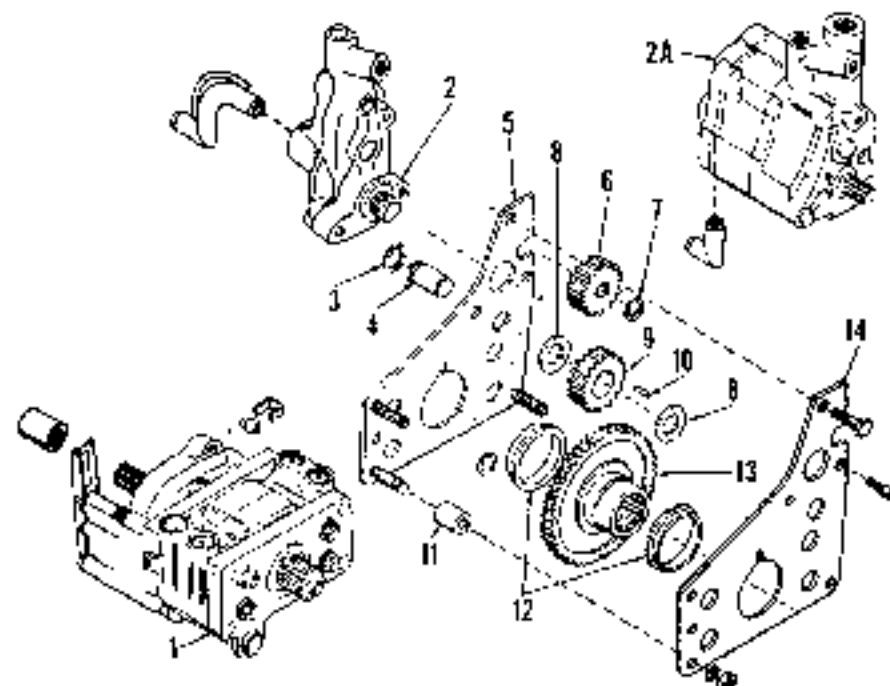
Exploded view of hydraulic pump drive gear train. Pump (2) is used for Multi-Power transmission alone and pump (2A) is used when equipped with both Multi-Power and auxiliary hydraulics.
